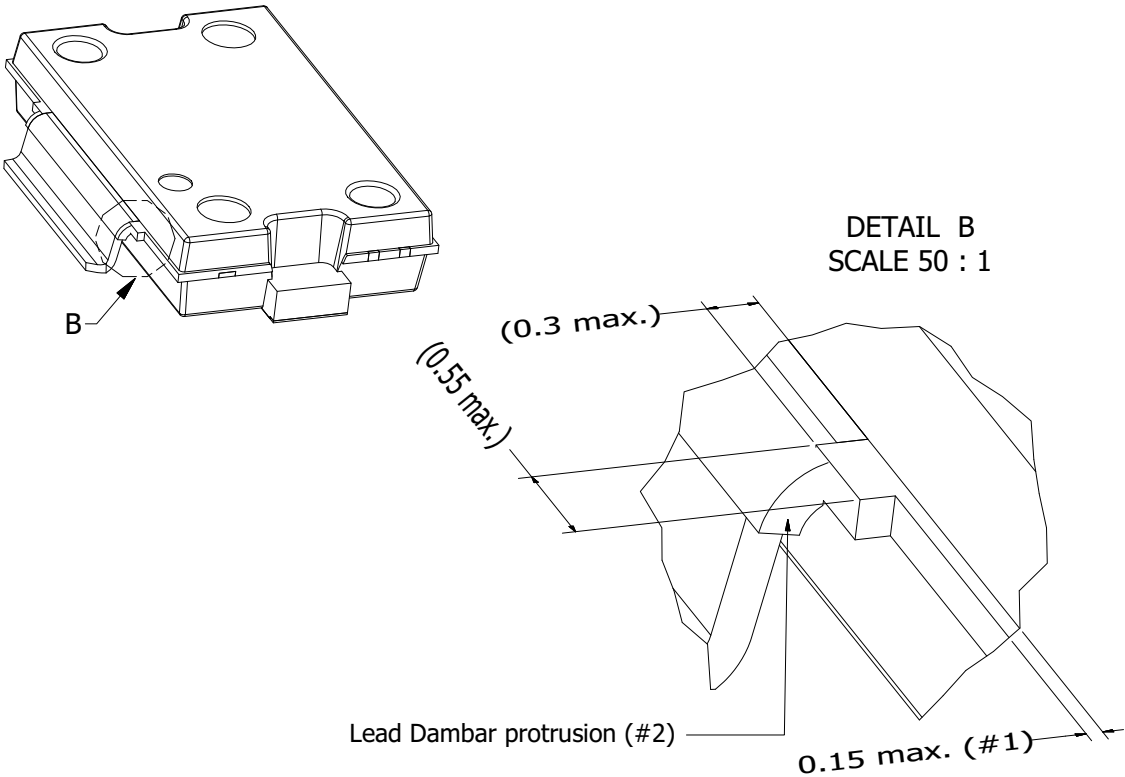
Package outline SOT1483-1 (sheet 1 of 2)
